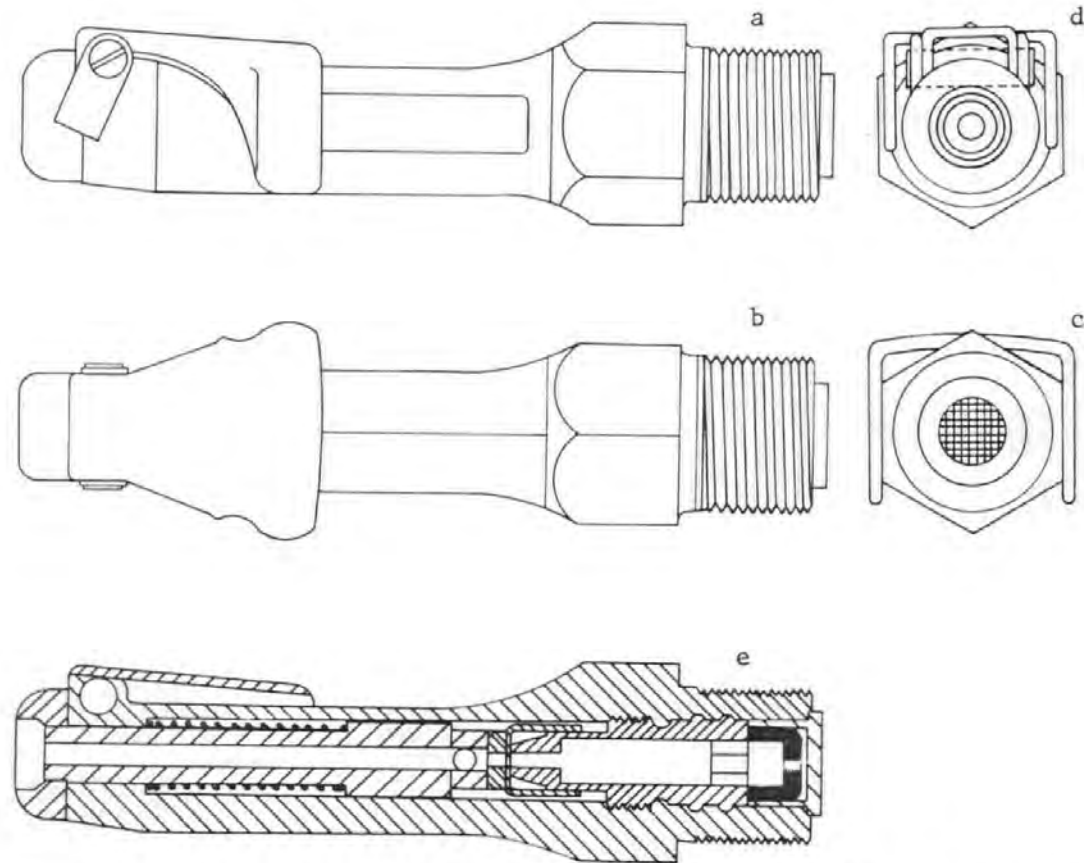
Arato¹ 80 bite drinker. (a) Side elevation; (b) top elevation; (c) end elevation; (d) front elevation; (e) cross section (drawn to full scale).
